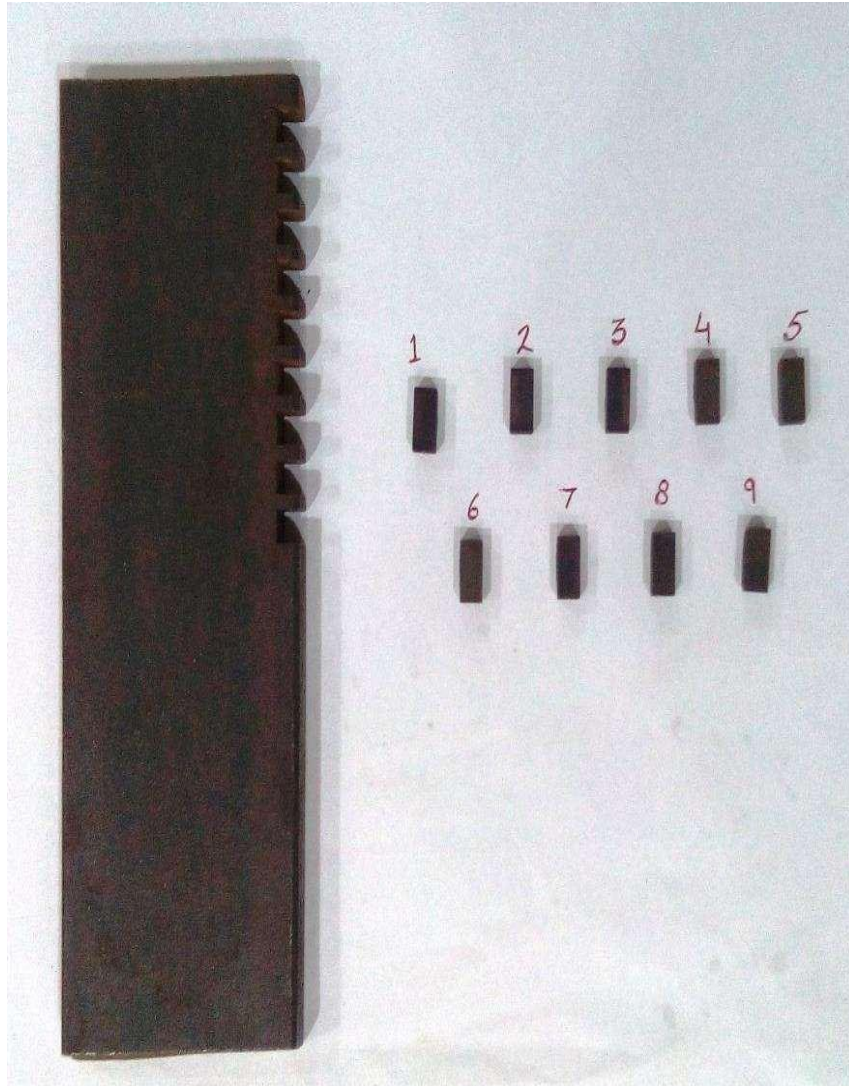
Die-Steel D3 bar and the cut pieces by WEDM
